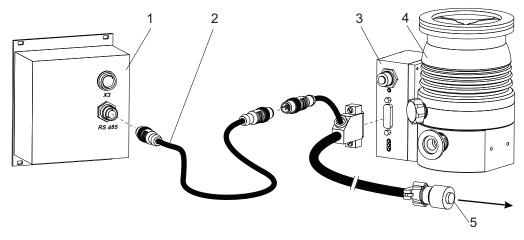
Example: Connection of a DCU 002 to a vacuum pump
